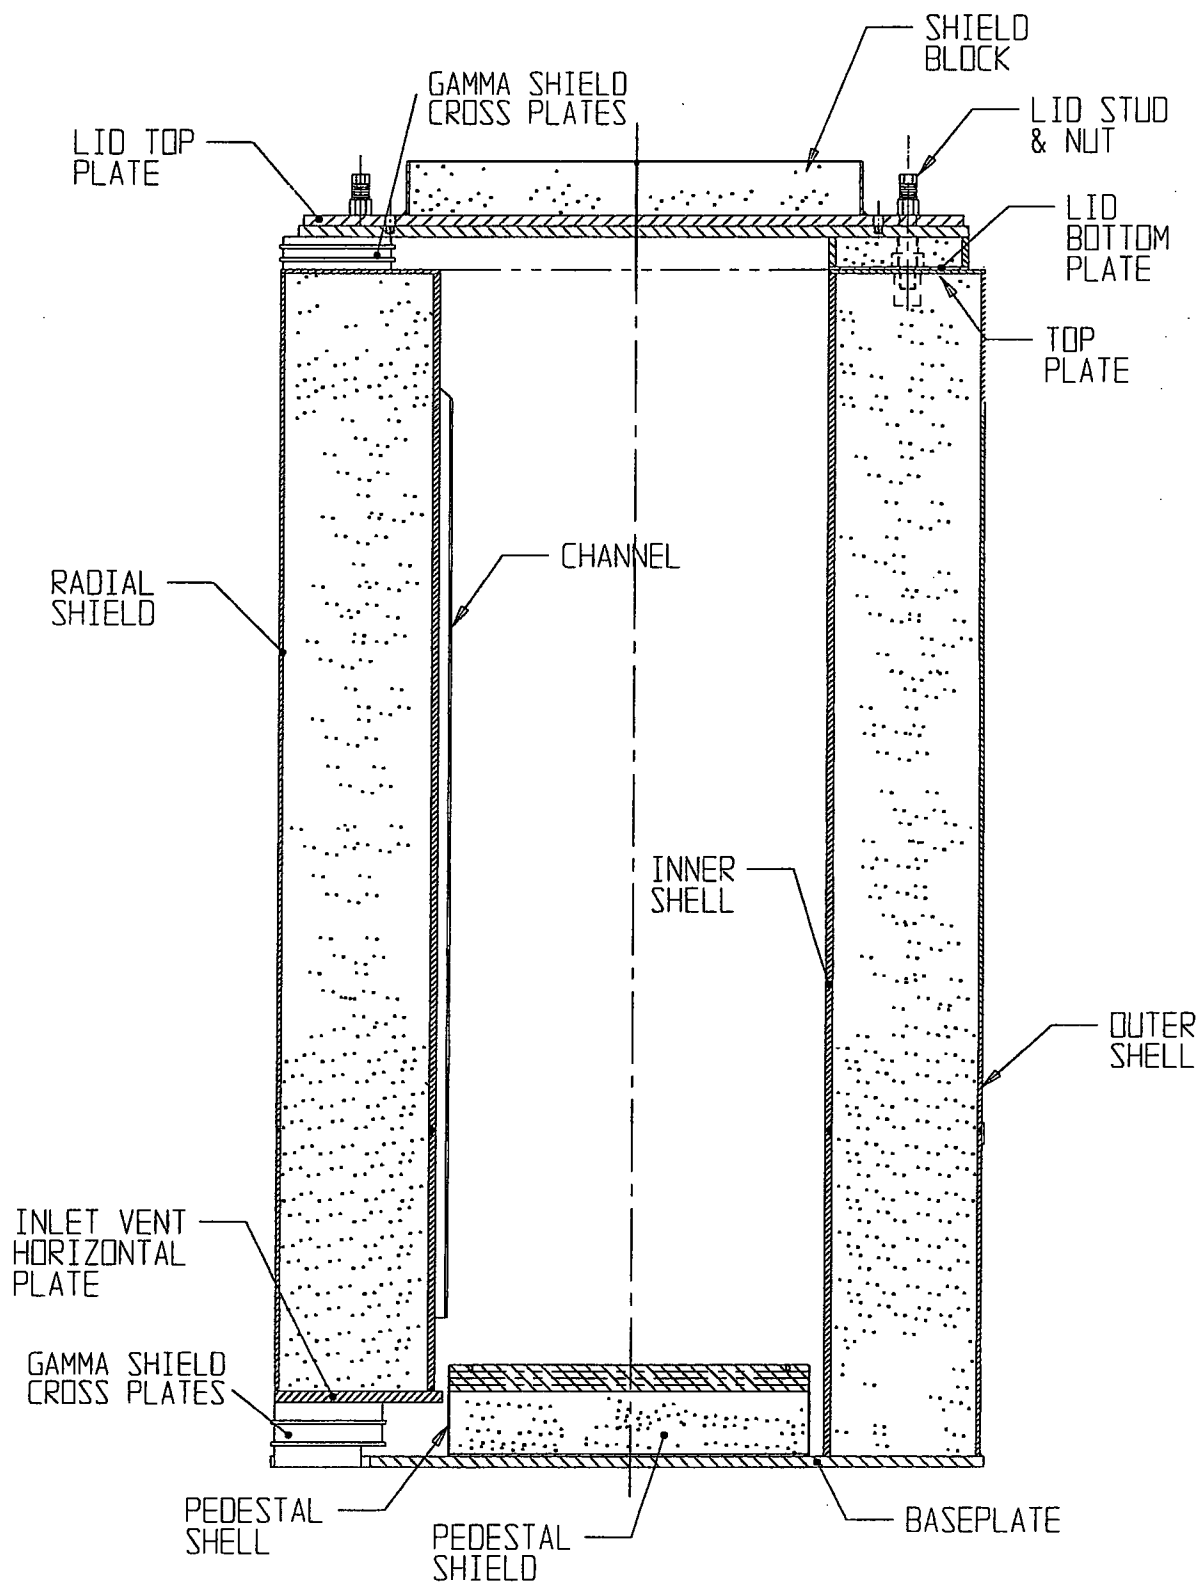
A; HI-STORM 100S OVERPACK CROSS SECTIONAL ELEVATION VIEW
